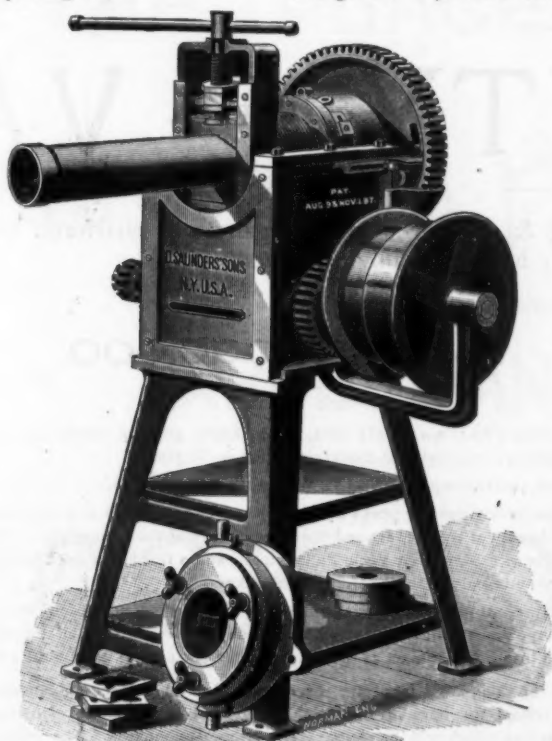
PIPE CUTTER AND THREADER FITTED FOR POWER.
